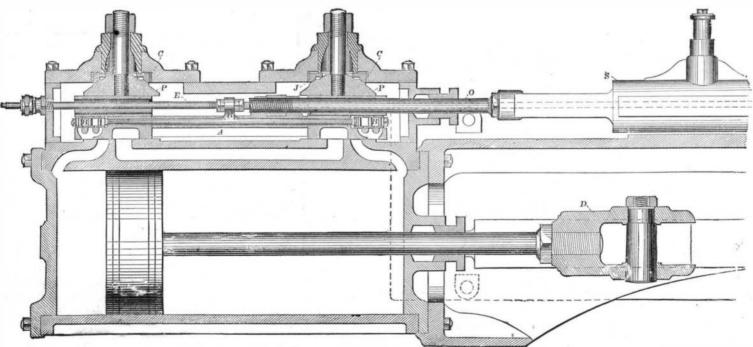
SECTIONAL VIEW OF CYLINDER AND VALVES.
